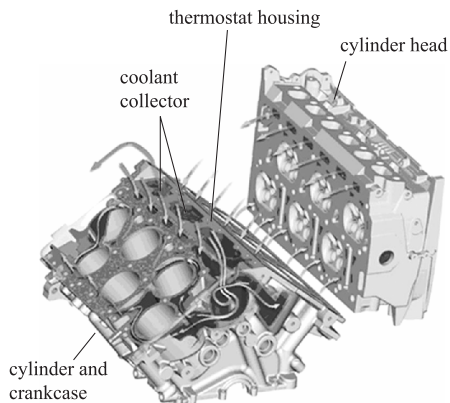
Cylinder Block and One Cylinder Head
